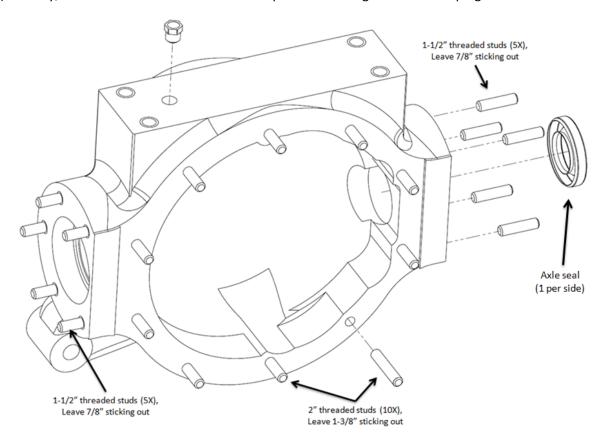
Install the vent, seals, threaded studs and drain plug (not shown) into the rear end housing
